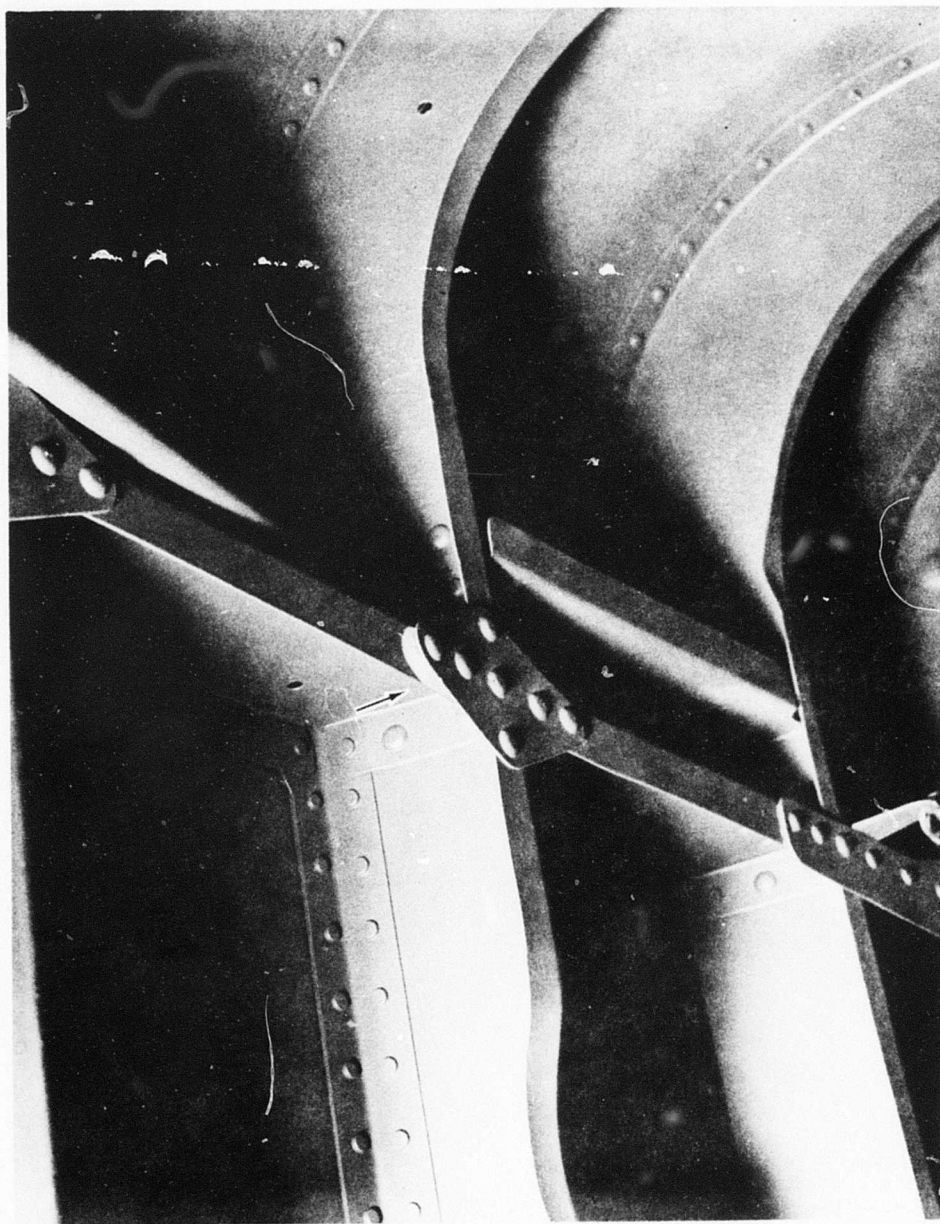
Main Rotor Pylon, Structural Damage, Popped Rivets.
